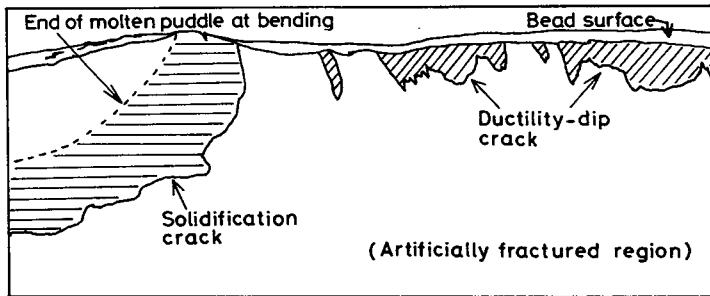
Sketch of Photo.2.5 showing location of solidification crack and ductility-dip cracks on fracture surface.
